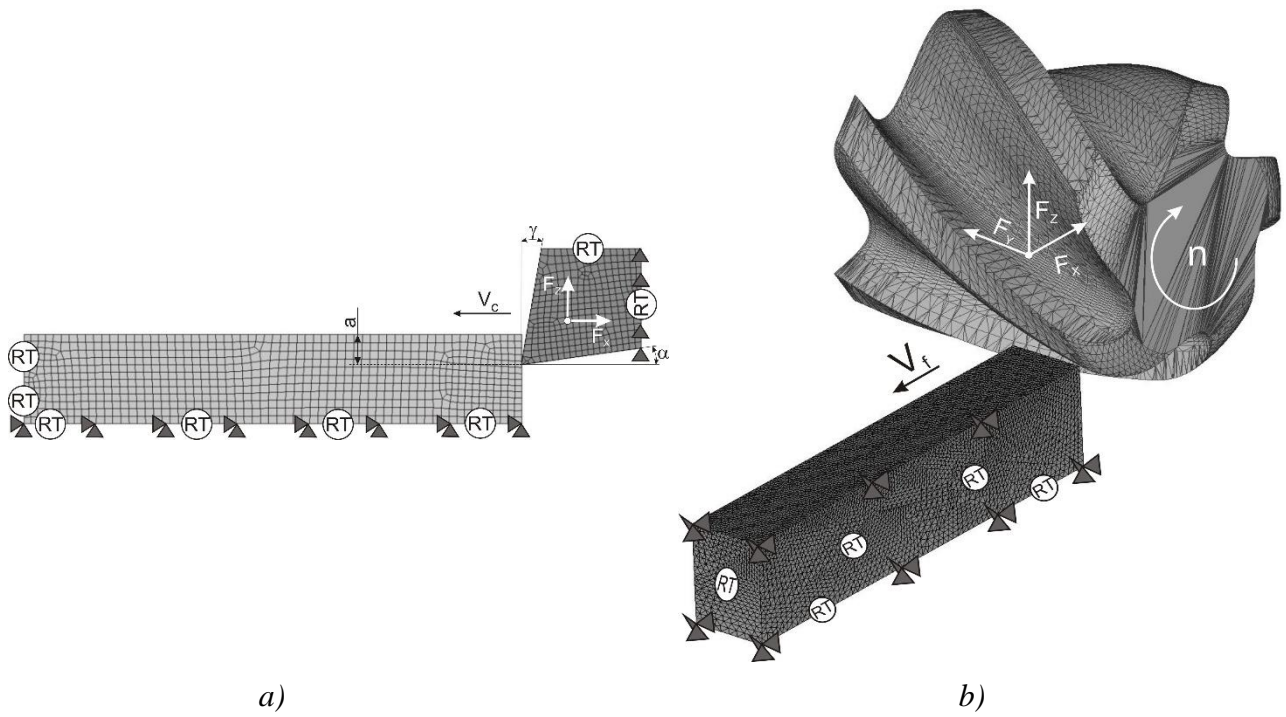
Initial geometry and boundary conditions of the orthogonal cutting model (a) and of the milling model (b)
